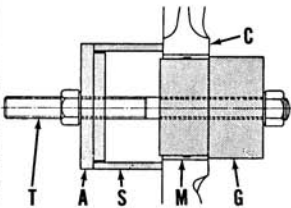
Removal of front or rear main bearing requires use of Yanmar special tool number 124085-92400 for all models except 3HM which uses special tool number 128670-92400. Install special tool as shown and draw old bearing (M) out through front of cylinder block (C).
